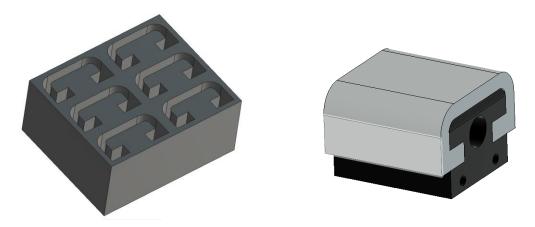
3D printed mold for silicone joint covers (Left) and joint and silicone assembly (right)
